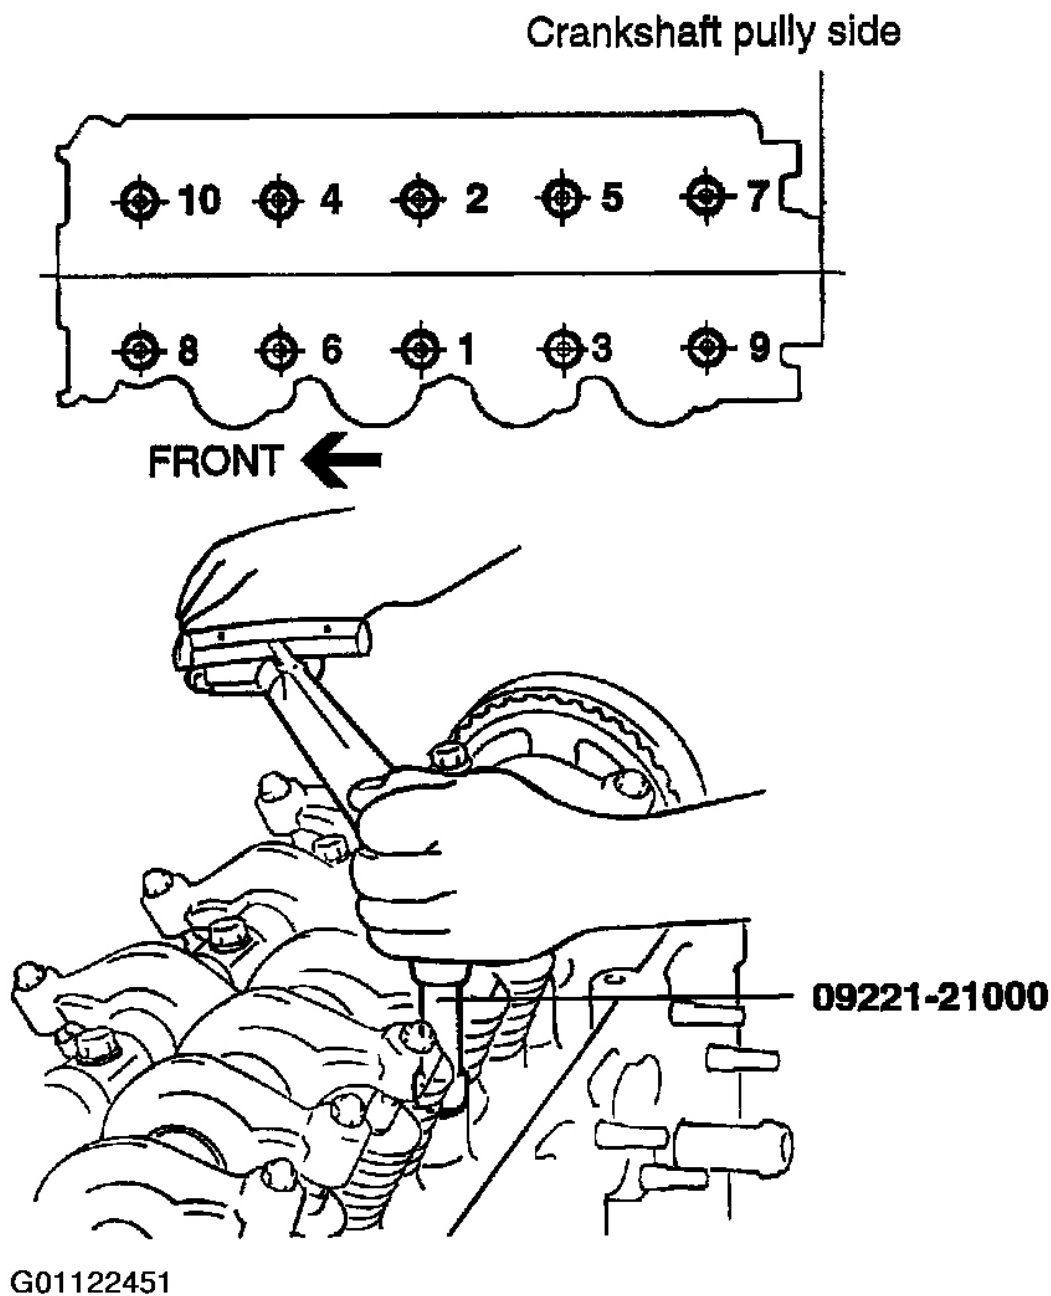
Installation Sequence Of Cylinder Head Bolts
